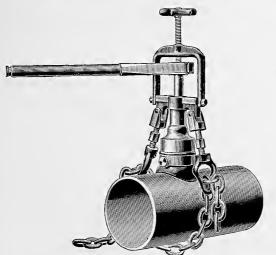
PAYNE'S DAISY DRY TAPPING MACHINE.
